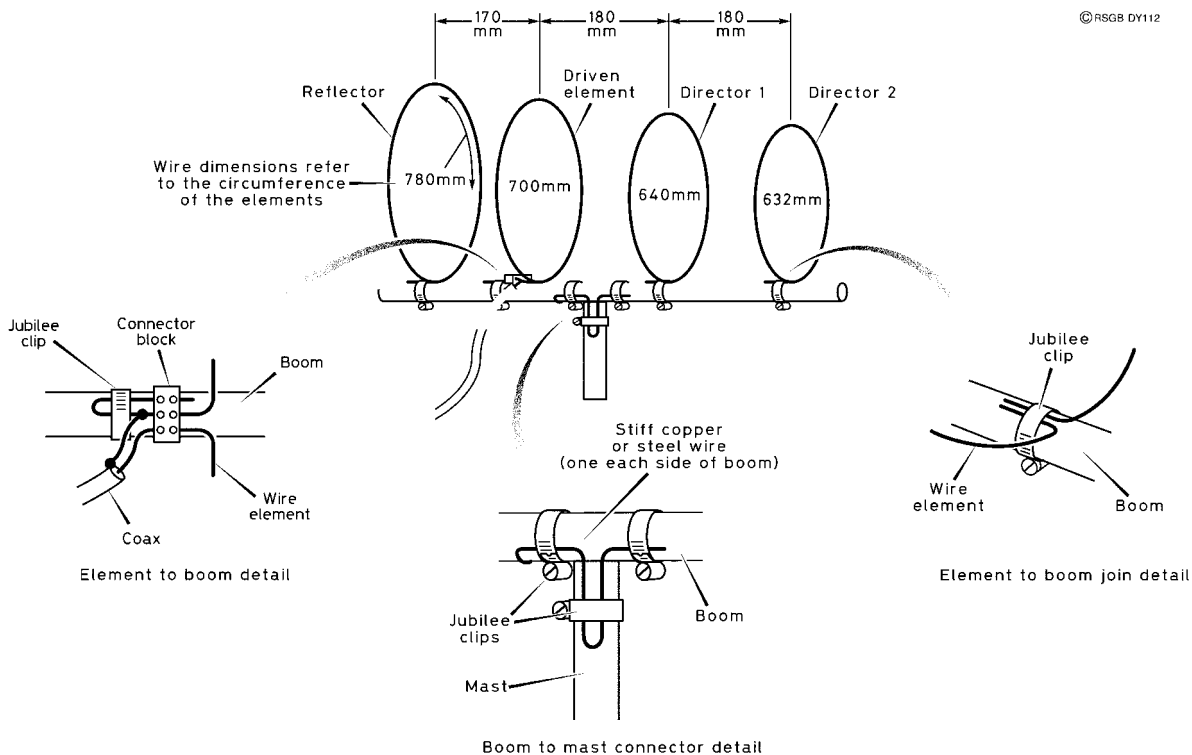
70 cm 4 element quad construction, with detail of how hose clamps are used in the construction
